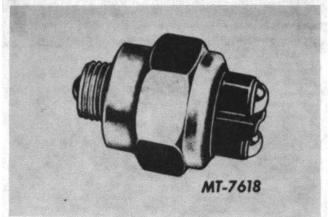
Electric Lockout Switch at Forward Shift Unit
